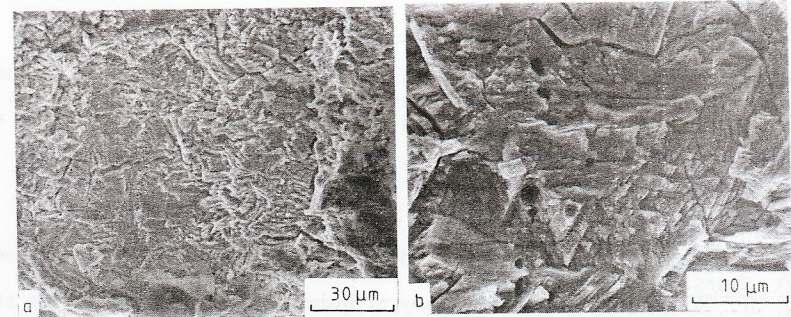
Fracture surface of the SSR tested AISI 316 steel. (a) A crack initiated at the edge of the specimen. (b) A detail of the hydrogen-induced crack. Note the crystallographic details and secondary microcracks.
